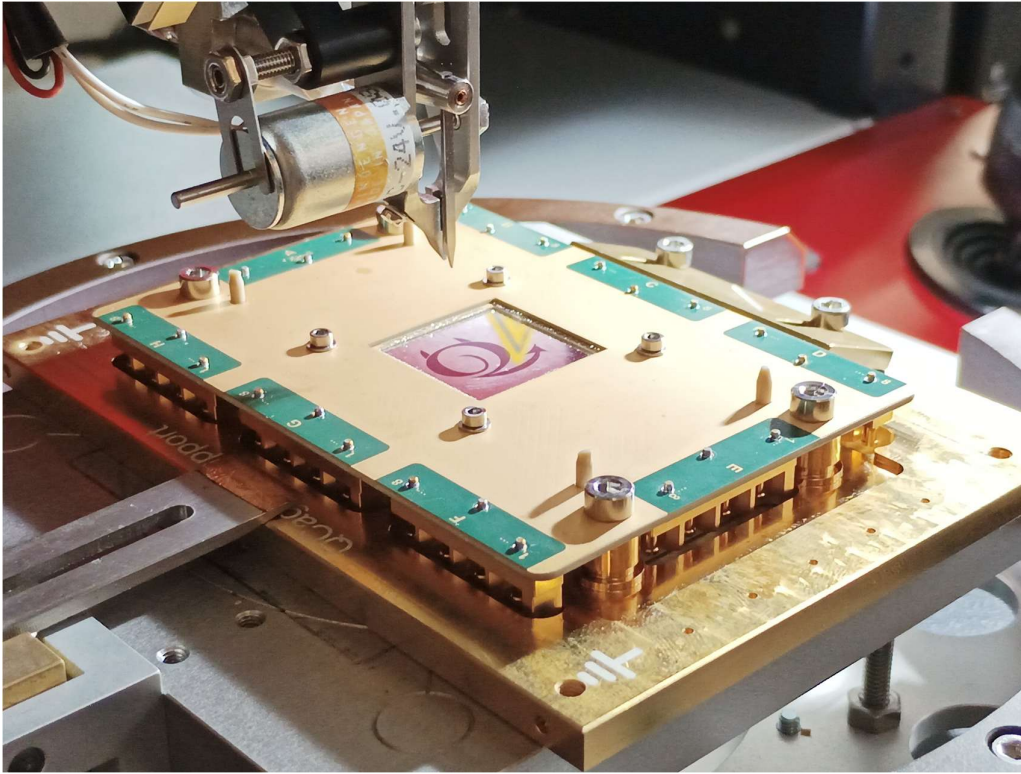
Utilizing the support fixture (QCAGE-64-WBF) with the chip holding frame (QCAGE-64-FRM) and the sample board (QCAGE-64-PCB) containing a chip. Mounted in an aluminum wedge wire bonder.
